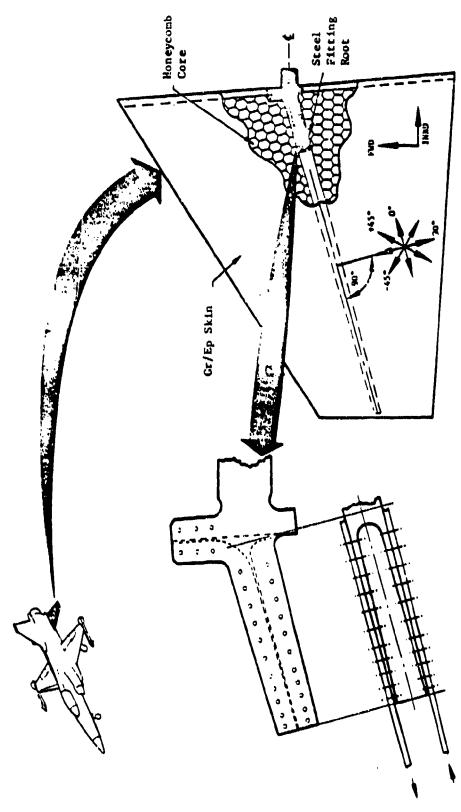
Skin-to-Rot Fitting Joint in the F-20 Horizontal Stabilizer.
